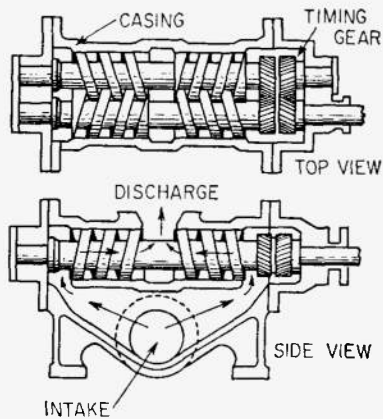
Two-rotor Screw Hydraulic Pump With Helical Gears
